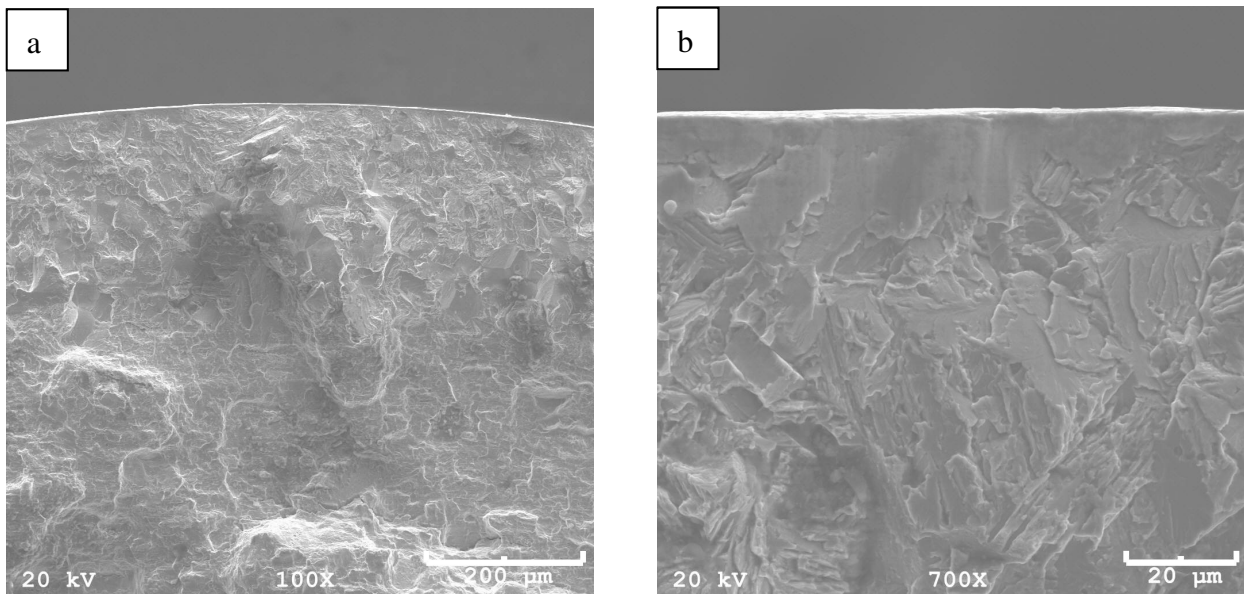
SEM photos of fracture surface of PH-42 Supra steel plasma nitrided fatigue test specimen in rotating bending test: a) rupture by brittle fracture and b) detail of fatigue crack growth at specimen surface.
